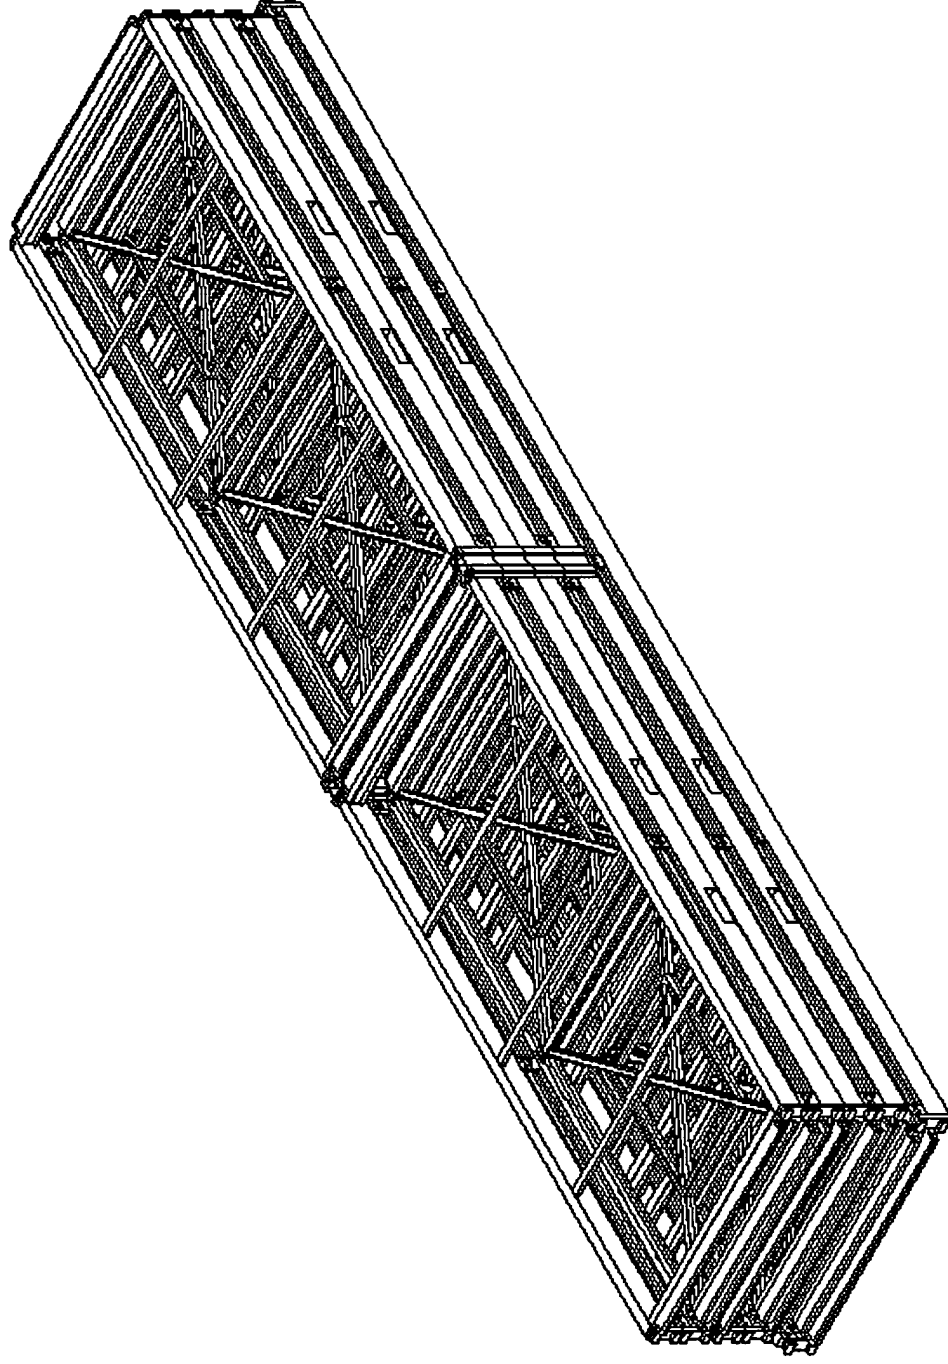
C: Step3 of disassemble and load process: The second "collapsible cargo container frame panel assembly" is stacked on top of previous assembly.
